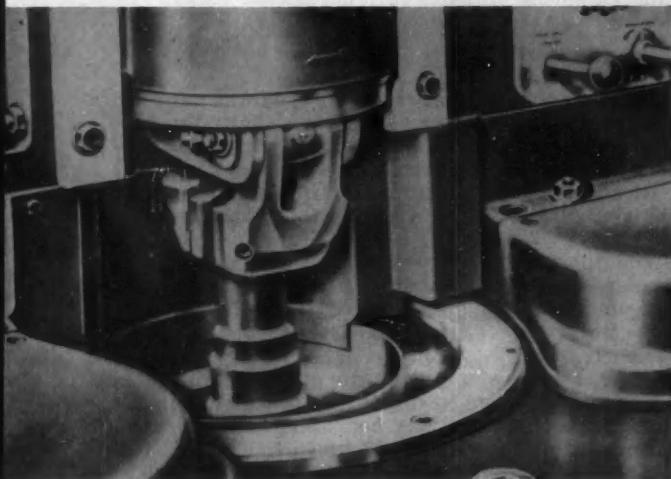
Workpiece clamped in the jaws of the machine used in the rotary forging process. The workpiece rotates and is beat into the desired shape by four horizontally-opposed hammers.
